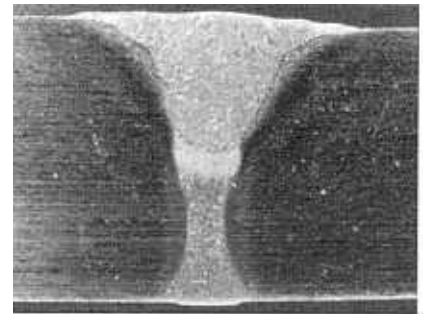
Laser hybrid welding of 11 mm 22%Cr duplex stainless steel. A first laser-hybrid run was combined with a second MIG run to optimise weld properties and bead profile. Addition of a standard 22%Cr 9%Ni 3%Mo (OK Autrod 16.86, Ø 1.0 mm) filler wire was used to ensure sufficient weld metal austenite formation.
